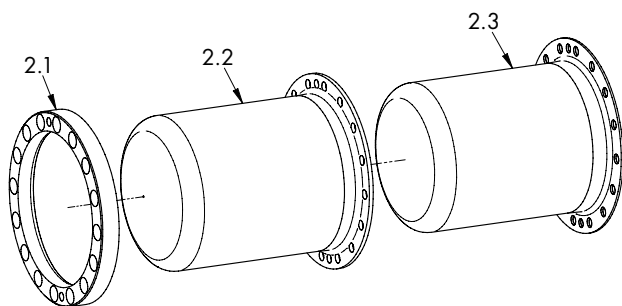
Components/assembly canisters made of CFRP with PTFE inliner (A2)
